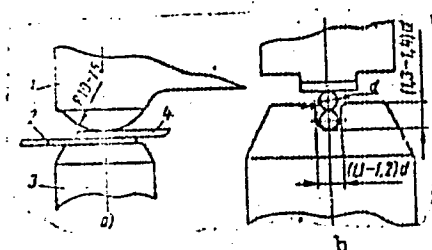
Welding head geometry for wire-to-plate (a) and wire-to-wire (b) welds: 1- instrument, 2- plate, 3- reflector, 4- wire
